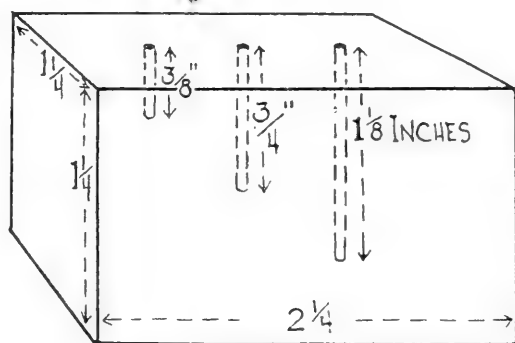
PINNING BLOCK. The block is $1\frac{1}{4} \times 1\frac{1}{4} \times 2\frac{1}{4}$ inches, with holes drilled to the depths shown and having diameters only slightly greater than the largest pin which will be used. A specimen is pinned and the pin inserted into one of the holes until it touches bottom; thus the insects of any class or in any case may be pinned uniformly at the desired height.
